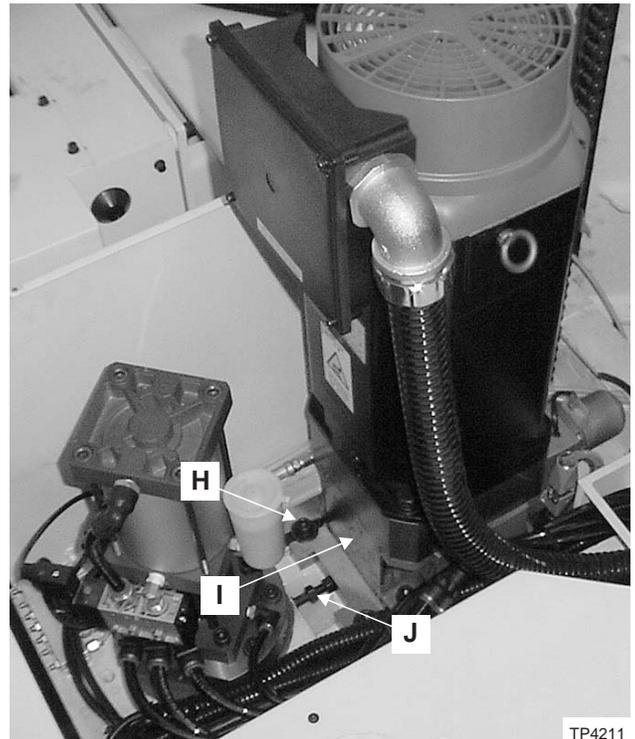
High-Torque Gear Box and Adjustment Screws (shown with Fanuc motor)
